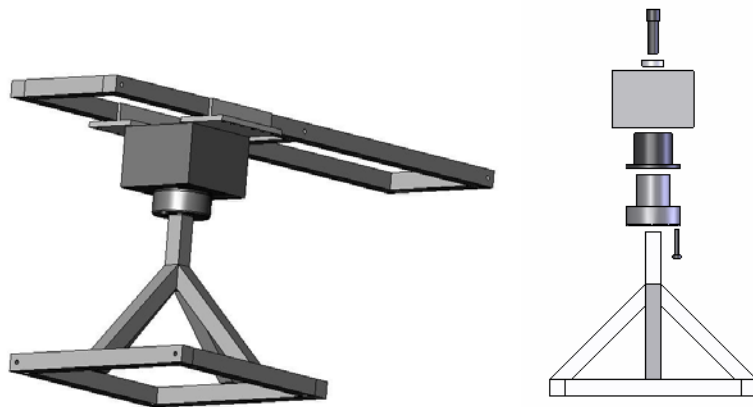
Rotator attached to sliders (left) and expanded view of rotator (right)
